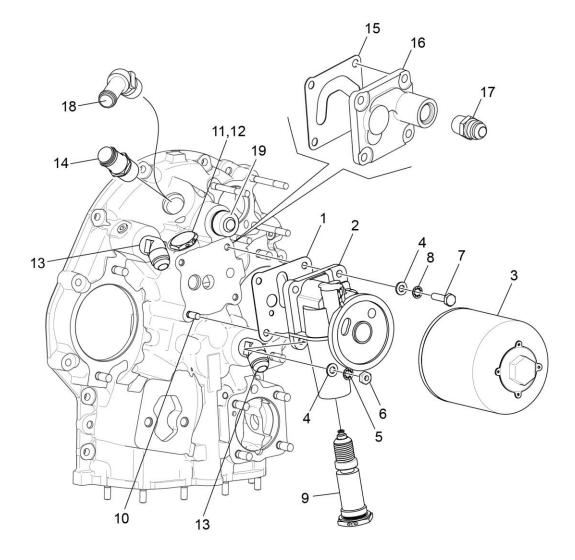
Oil Filter Assembly, Oil Cooler Bypass Valve, and Fittings
